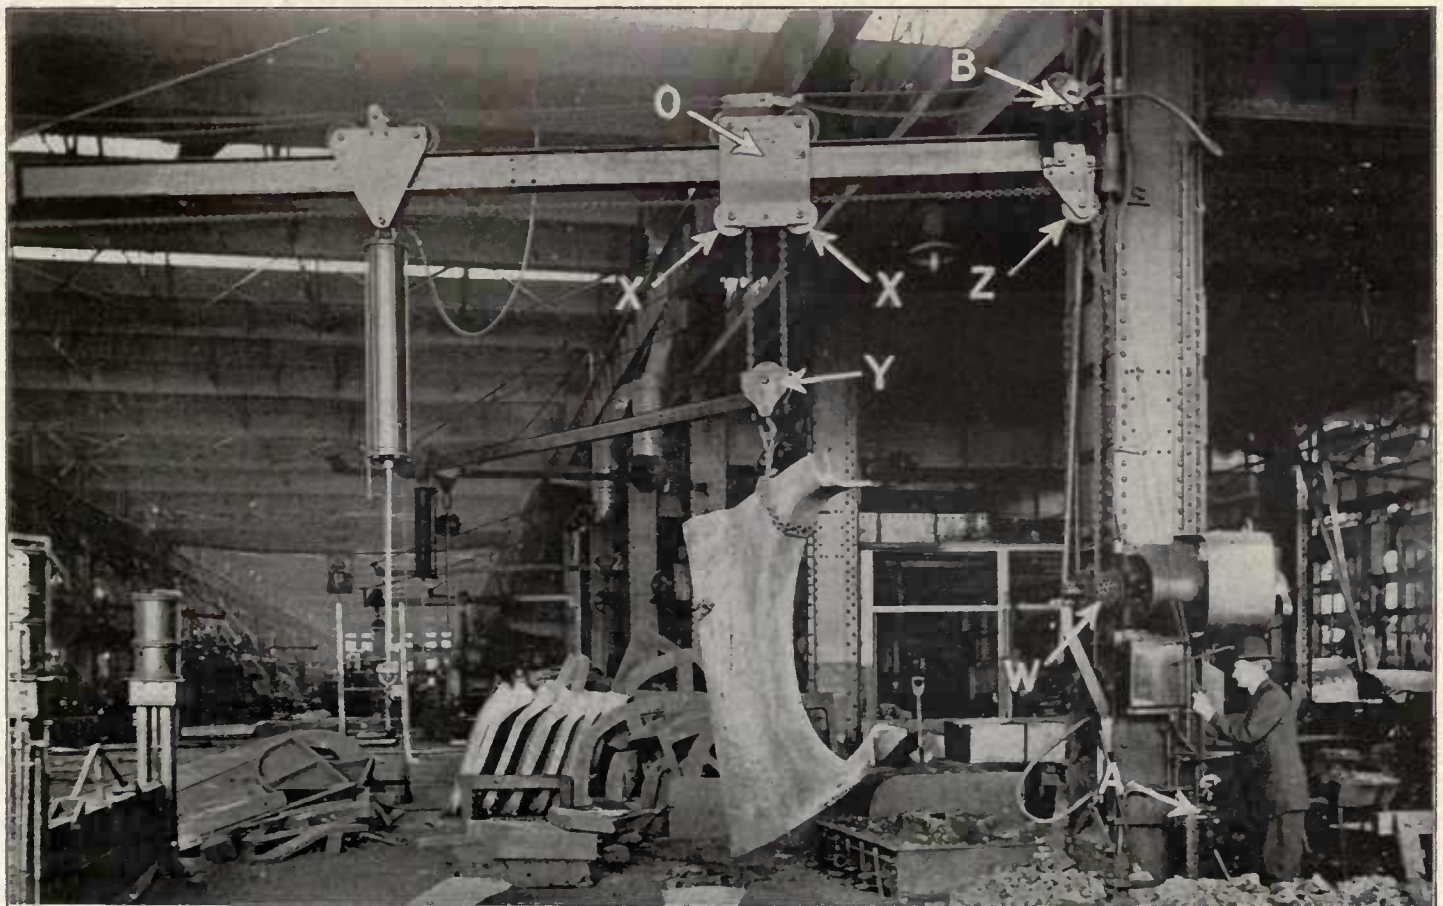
Air-Electric Hoist Used in Connection with the Flanging of Boiler Sheets.
